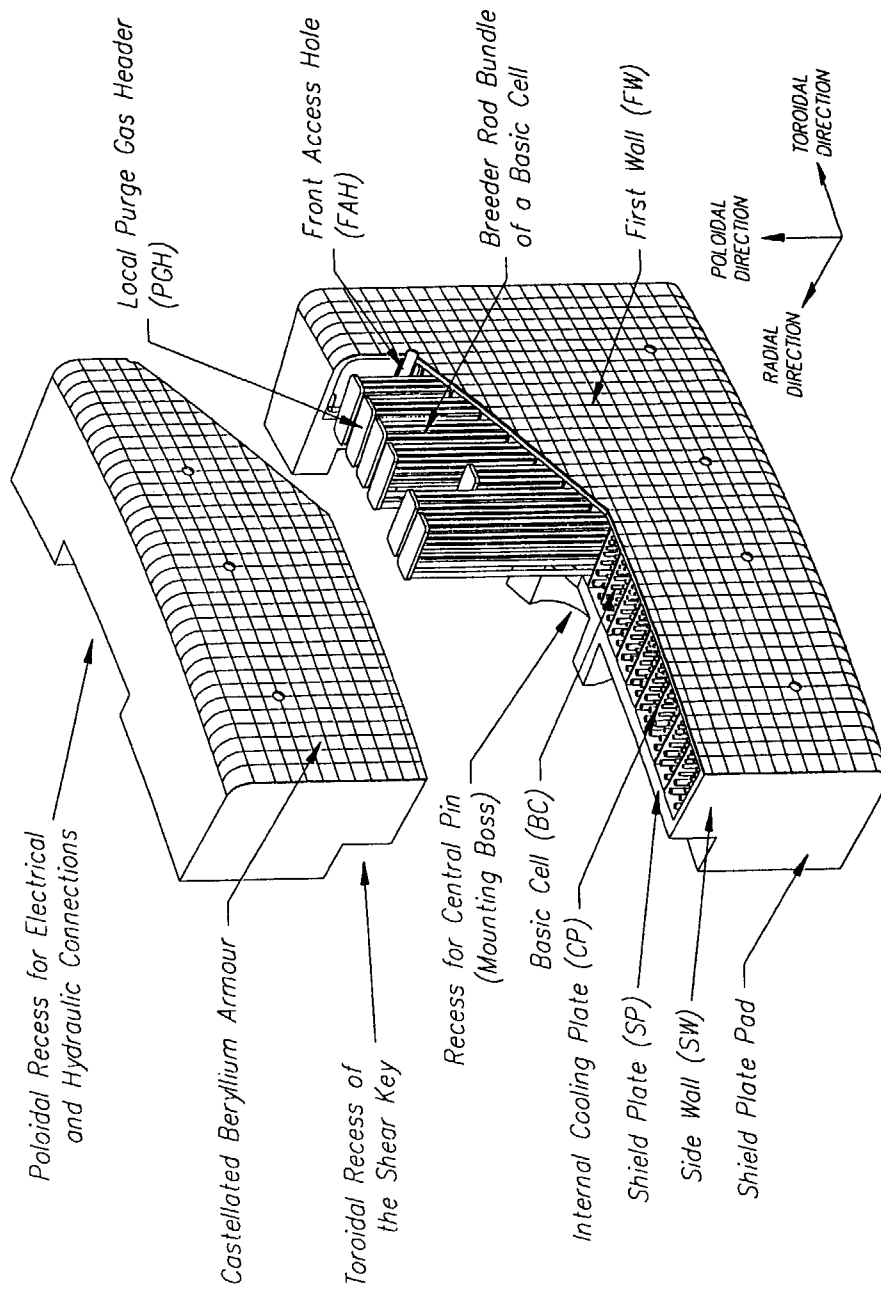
Isometric sketch view of breeding blanket module [7]
